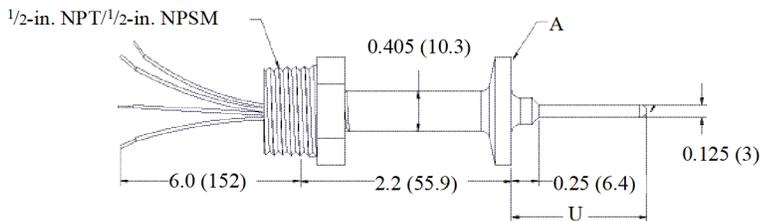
Rosemount 68Q Mini General Purpose Sensor with Cable and Strain Relief
